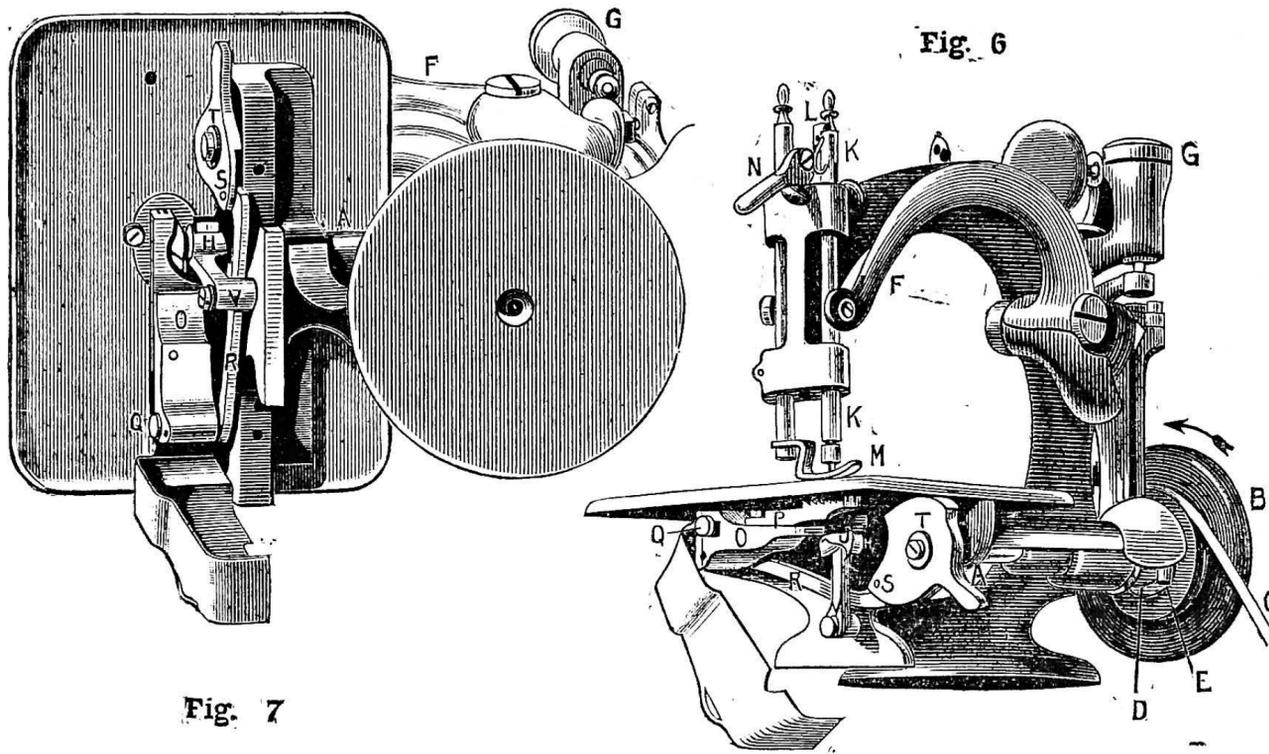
gives a view of the machine from the front, with under cap open, showing rotating hook, or looper, and feed arrangements. The main shaft, A, runs through the base of the machine, and under raised work-table, carrying at one end the small grooved balance-wheel, B, which is rotated by a band, or belt, C, and the two eccentrics, D and E, one operating the rocking arm, F,
